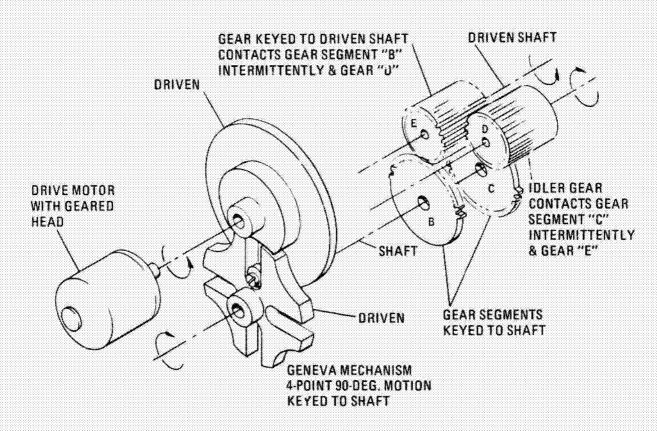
Module with geneva mechanism and segmented gear reverser.
